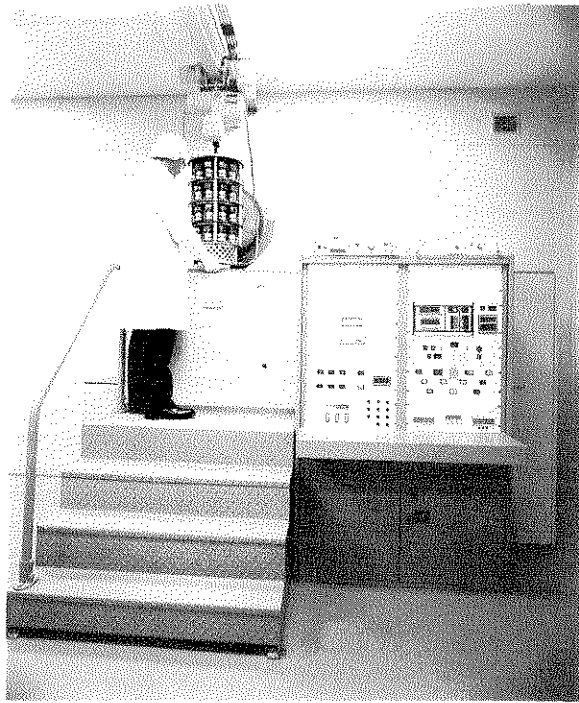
Ceramic envelope vacuum switches being loaded into the vacuum furnace for the single-shot manufacturing process.
